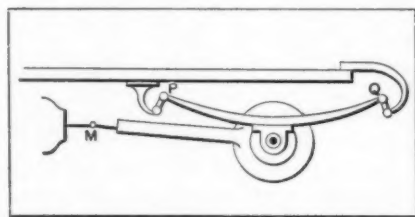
Live rear axle with T casing that takes the torque and thrust efforts, the front end of the springs being shackled and one universal joint at the front end of the propeller shaft. This type is referred to as A-1
